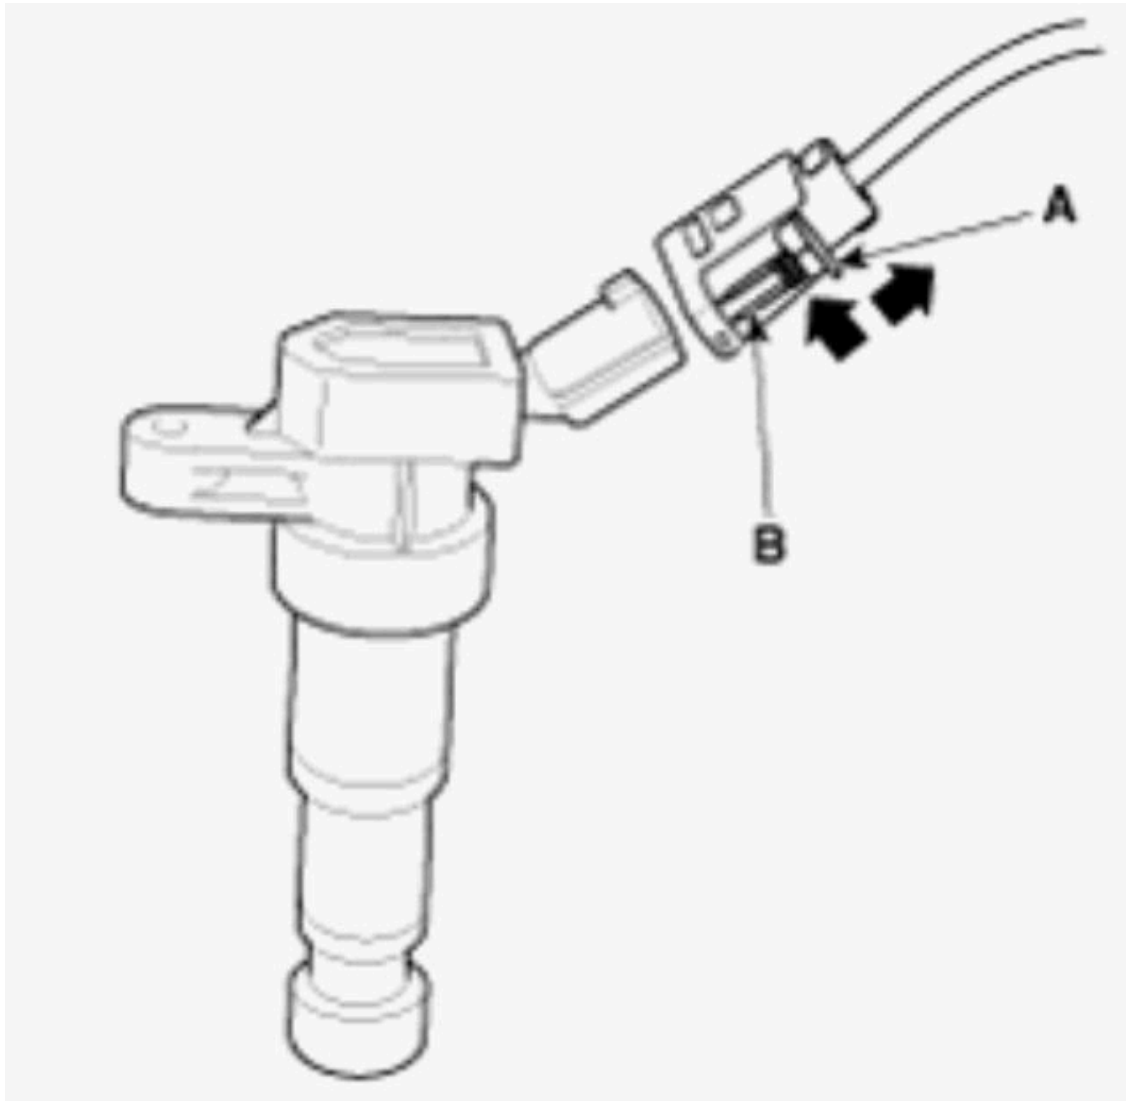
Identifying Lock Pin (A) & Push Clip (B)
